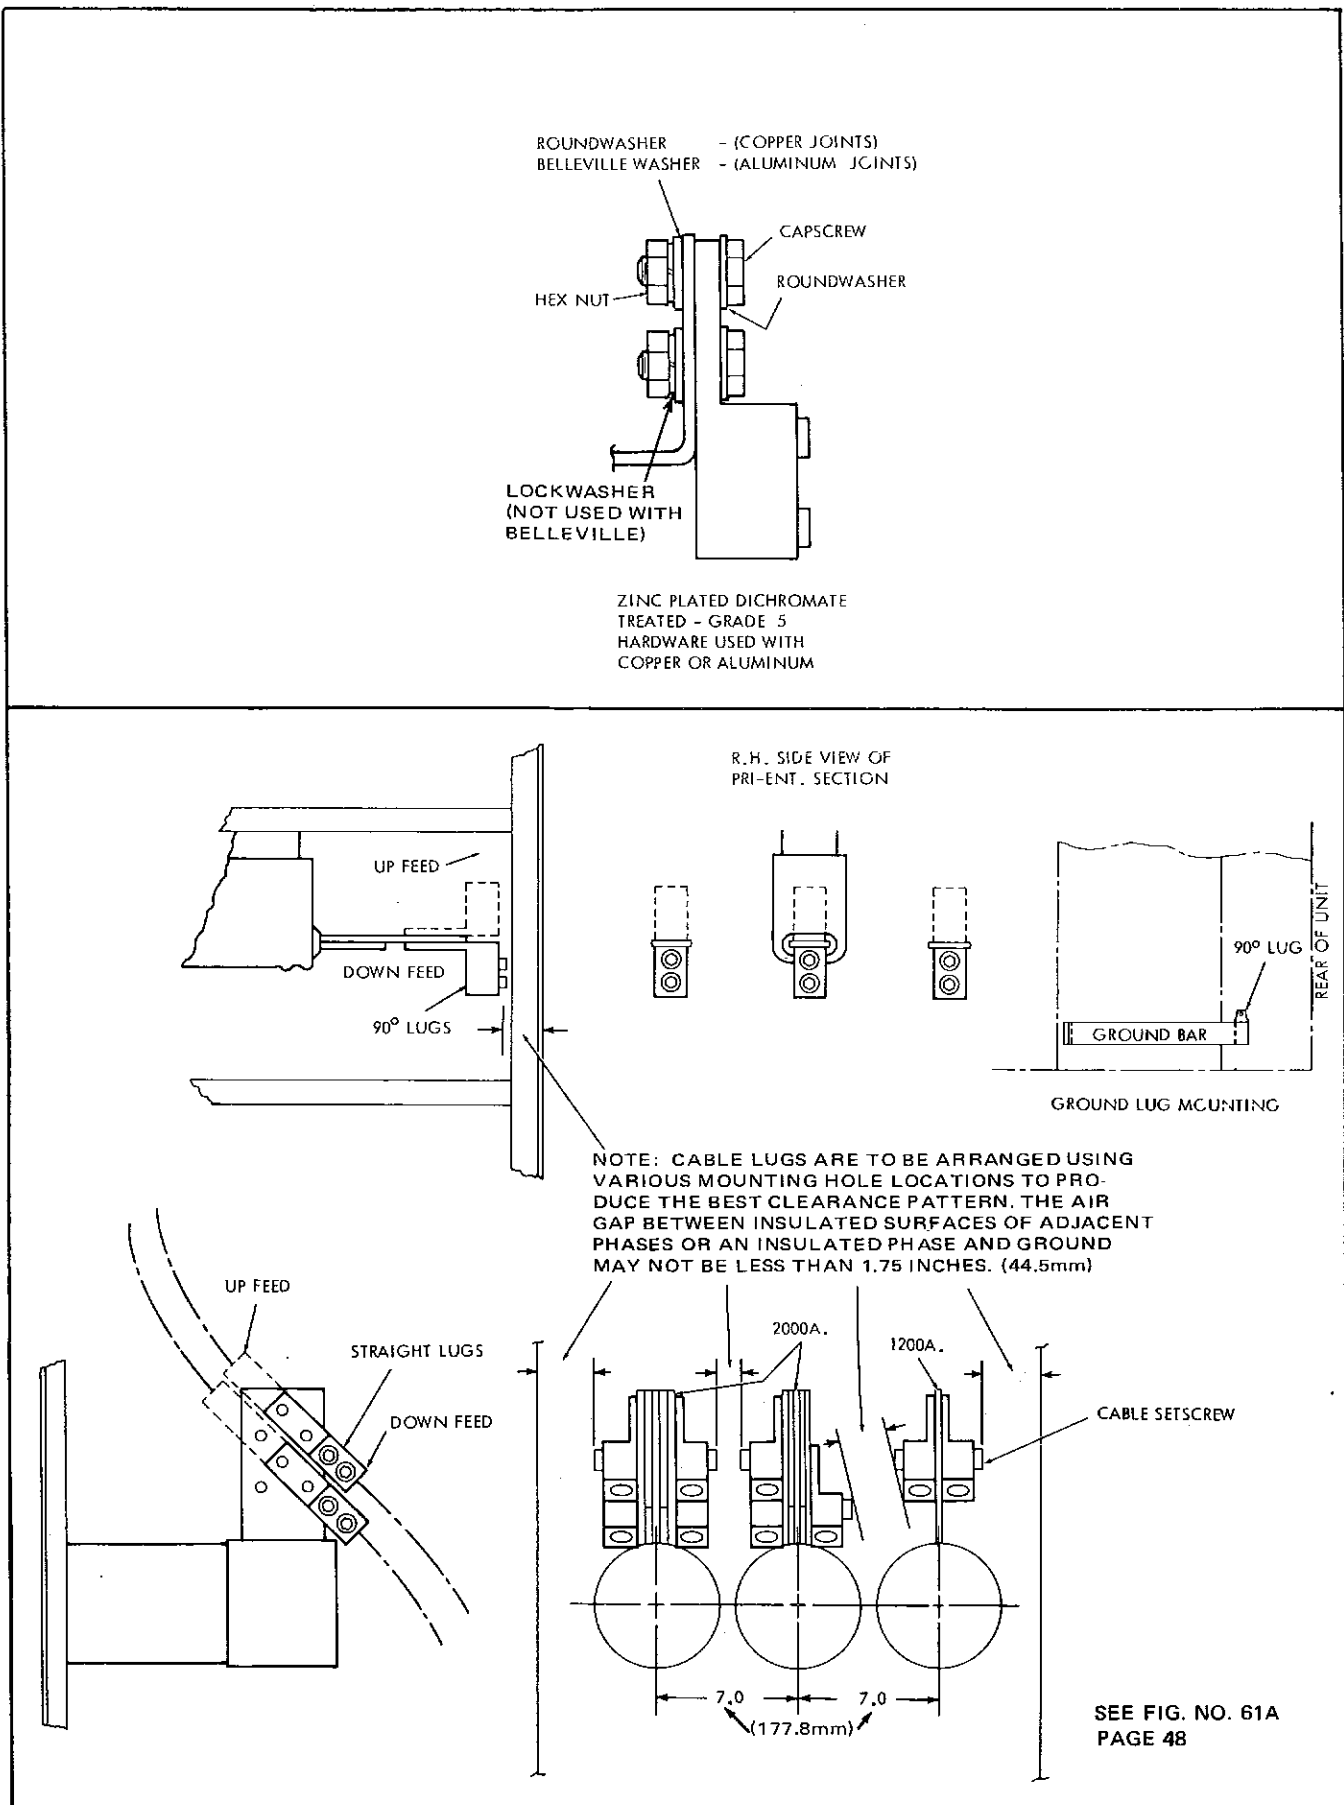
Typical Lug Mountings - 5 kV Switchgear
